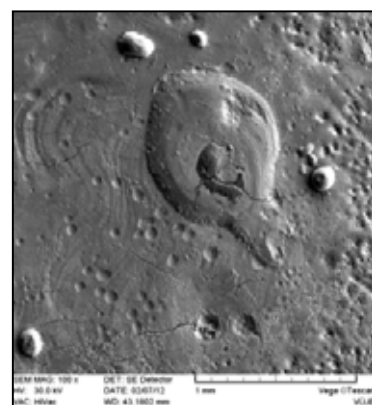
Micro cracks on the surface of a circular bead welded specimens of pool lining sheets.
